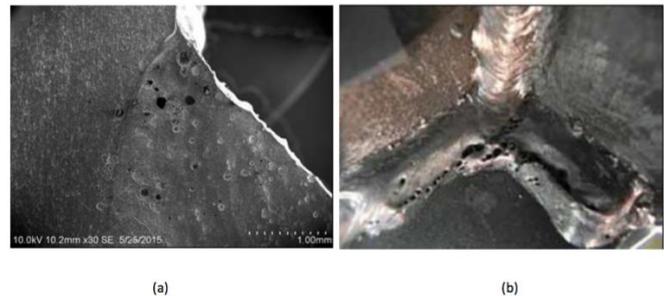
(a) An example of welding defect. (b) welded interface with porosities and slags.
